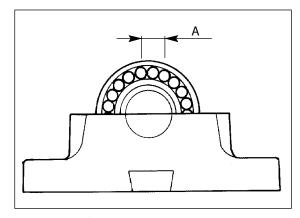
Push the feeler gauge between the rollers and outer ring.
